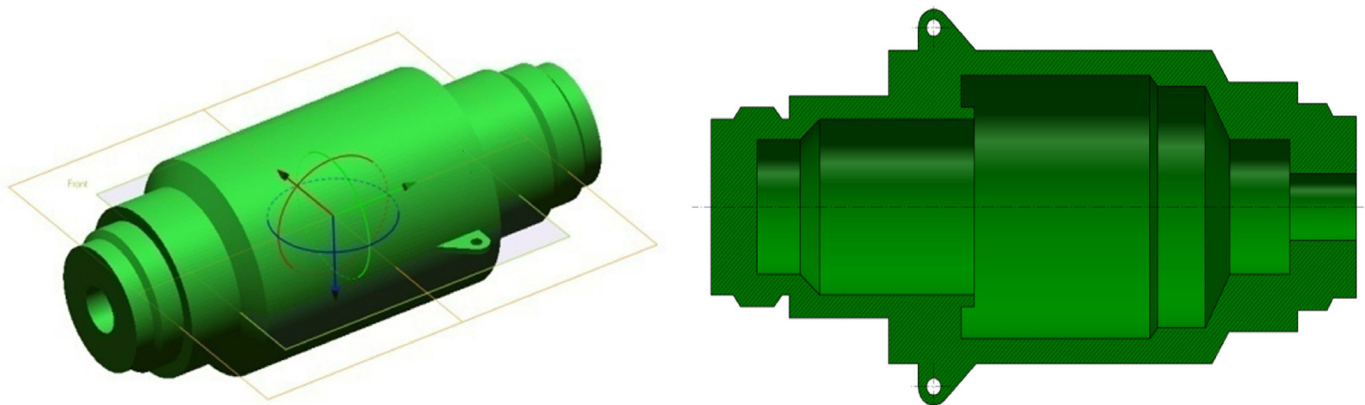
3D-CAD model and cross-section of the valve used in the printing process – assembly
